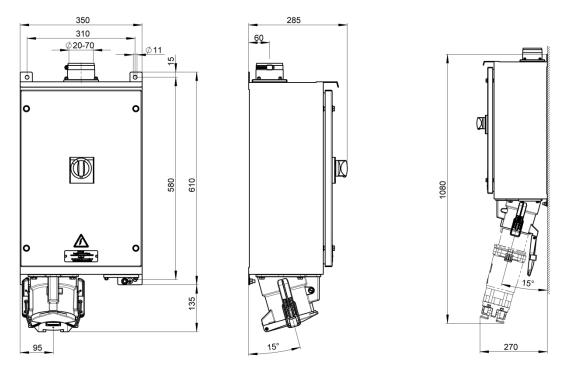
Dimensions, Connector Unit with Circuit Breaker CUCB C-Line (200A – 250 A) in mm
